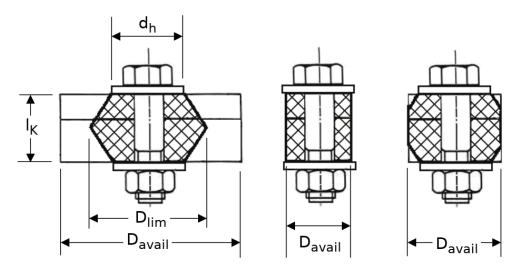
Compression zones in cylindrical clamped parts [2]
